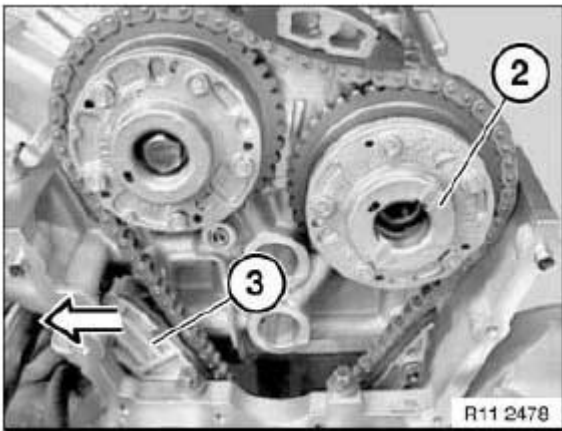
Identifying Exhaust Adjustment Unit And Tensioner Rail
